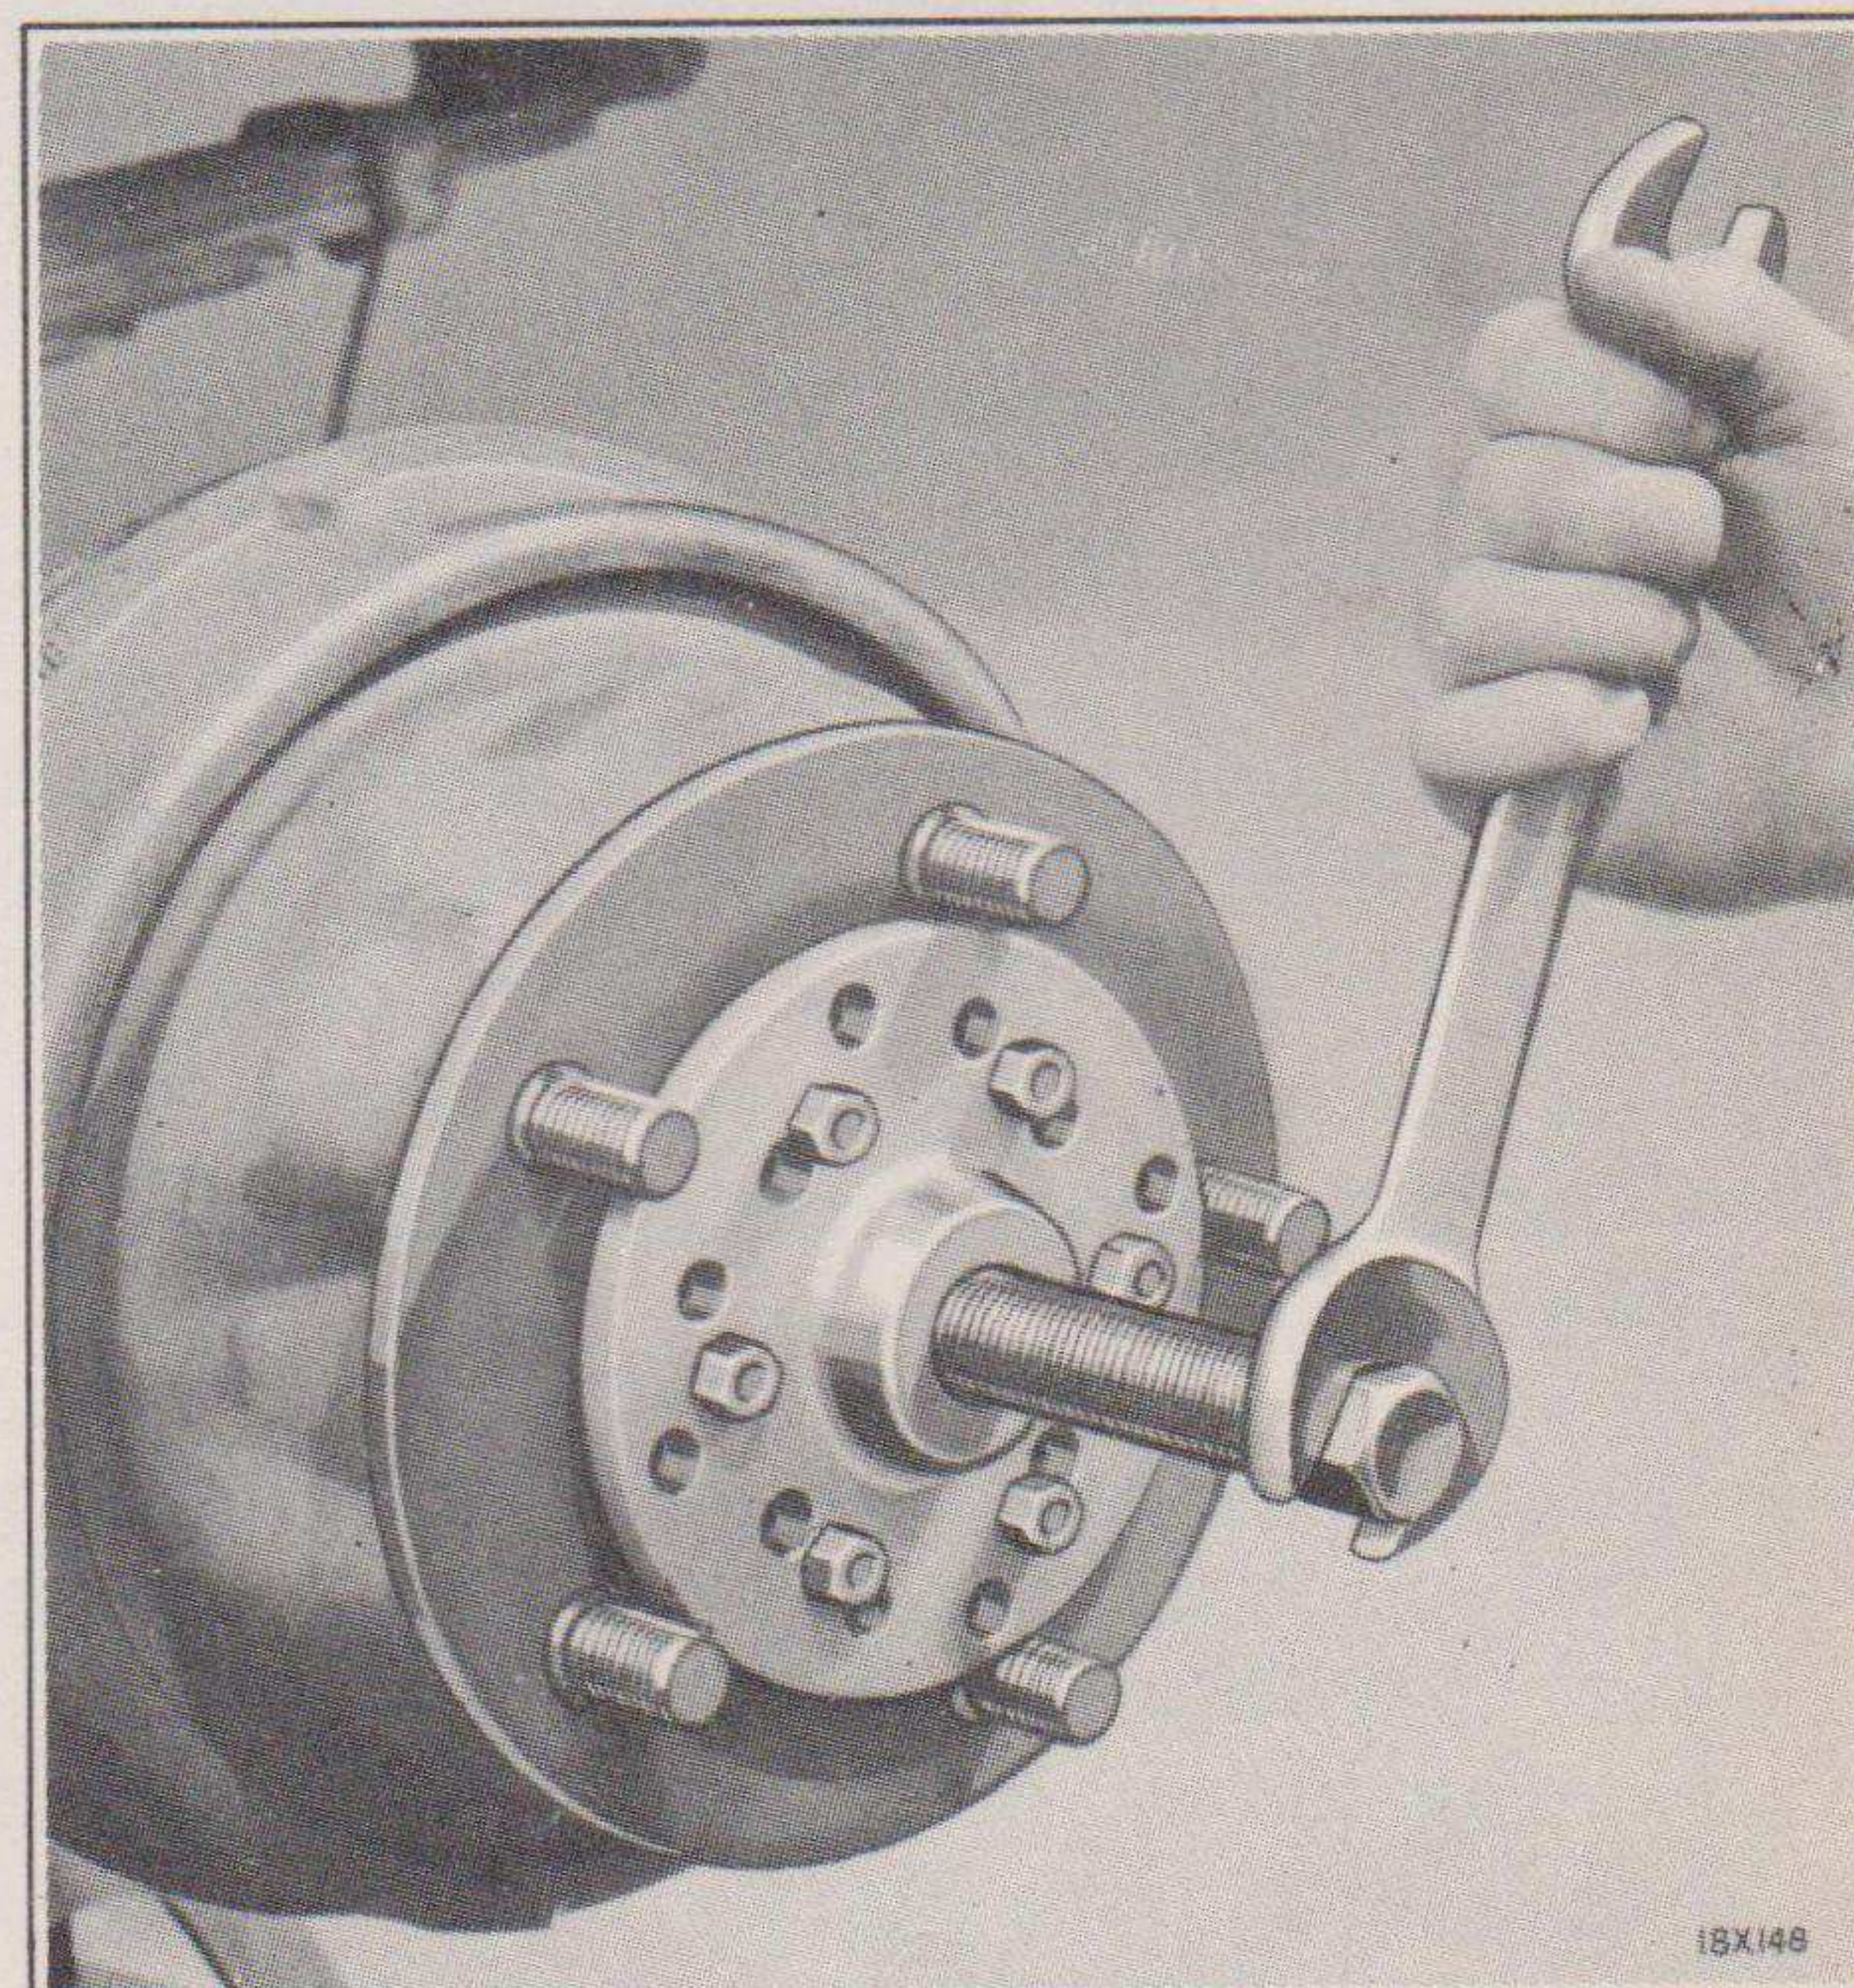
Removing Wheel Hub with Puller (Tool DD-423)
